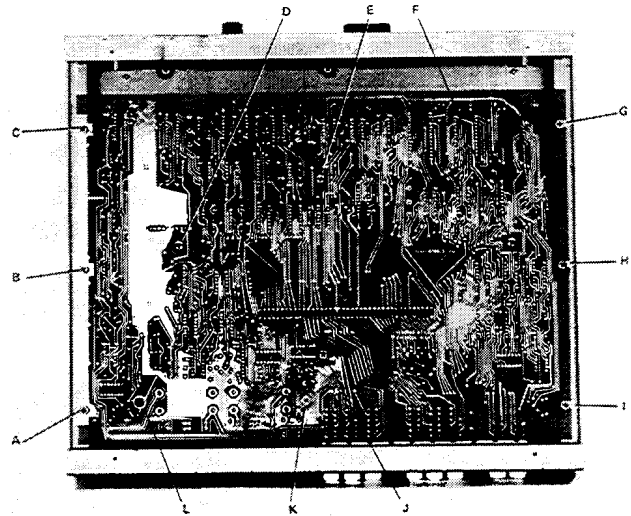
Bottom interior view. Screws ABCEGHJI hold the C board to the chassis. Screws DF hold display-board brackets. Screws KL hold the test-fixture guide block.
